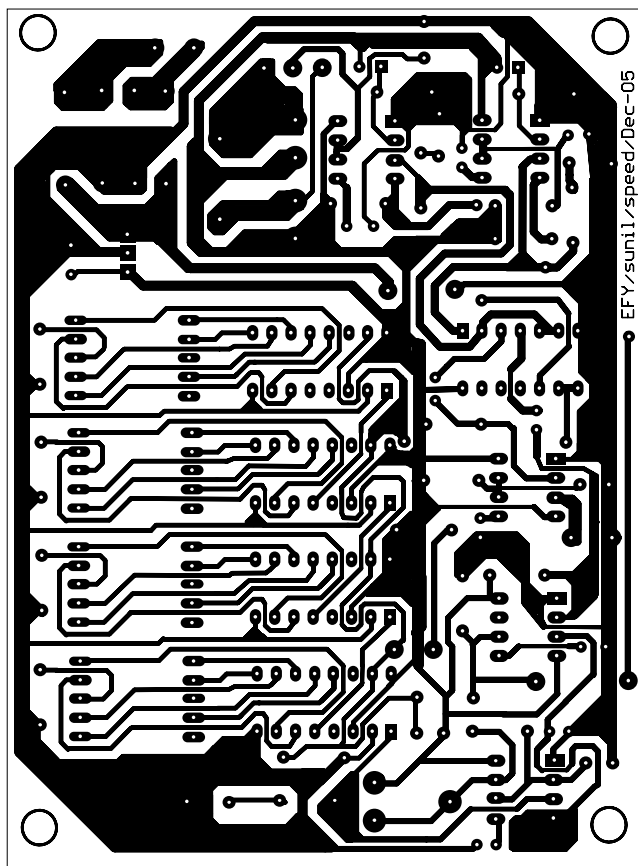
Actual-size, single-side PCB layout for the speed checker
